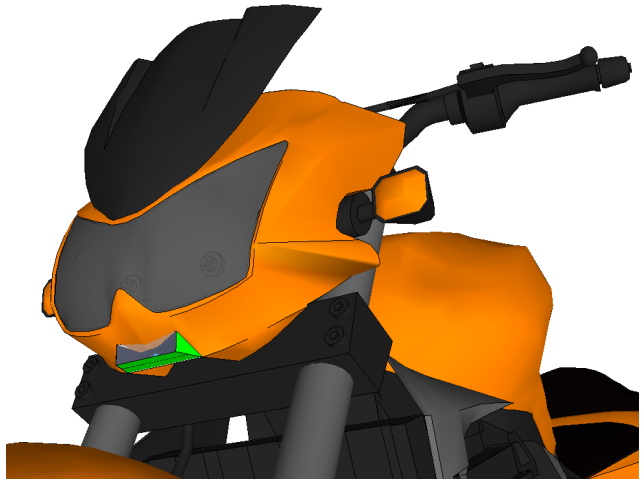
Design Mock-up - Bottom View - Motorcycle Model from SketchUp User 'Mandun'
